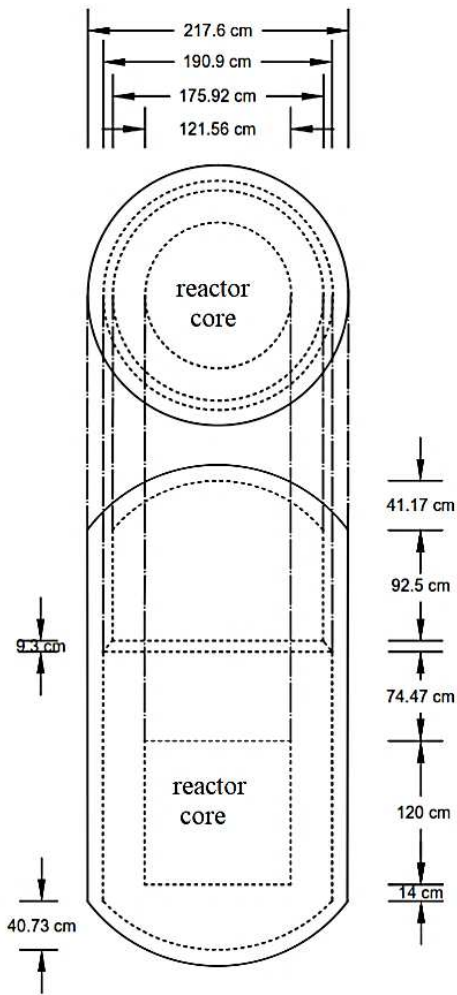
The projection image of the top and front view of the reactor vessel model with the position of the core inside
